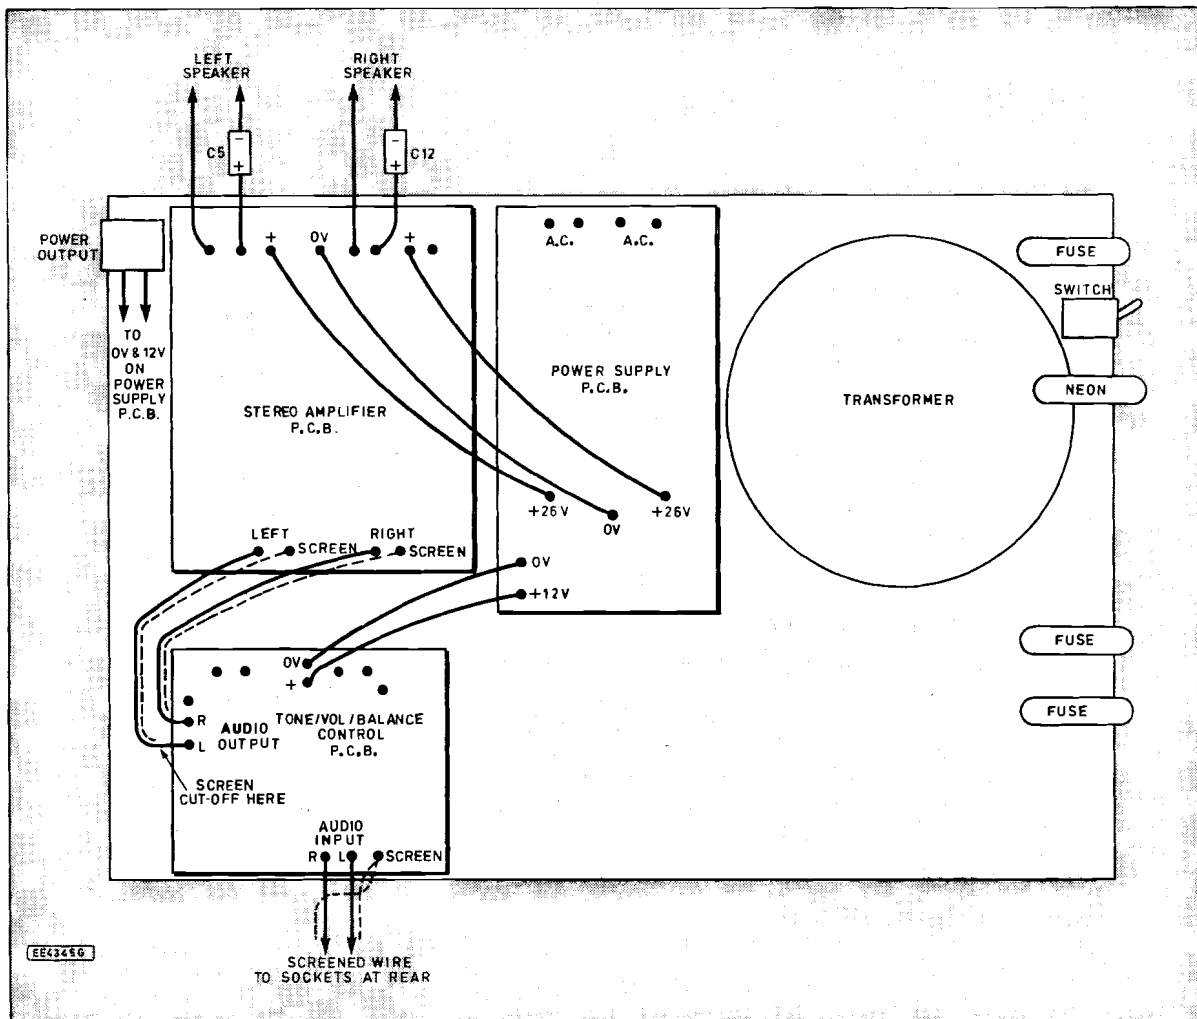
Positioning and interwiring between the Stereo Power Amplifier, Tone Control and System Power Supply printed circuit boards. All mains connecting terminal points at the fuse, transformer, switch and neon must be covered with insulating sleeving.
